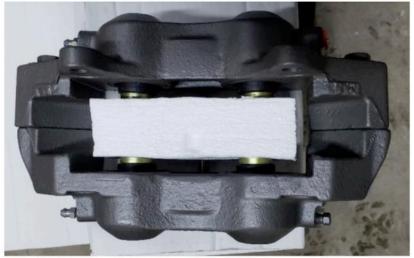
RR Caliper bottom view. No machining can usually be seen.
